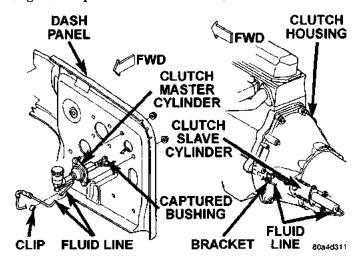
Slave Cylinder and Left Hand Drive Clutch Master Cylinder
